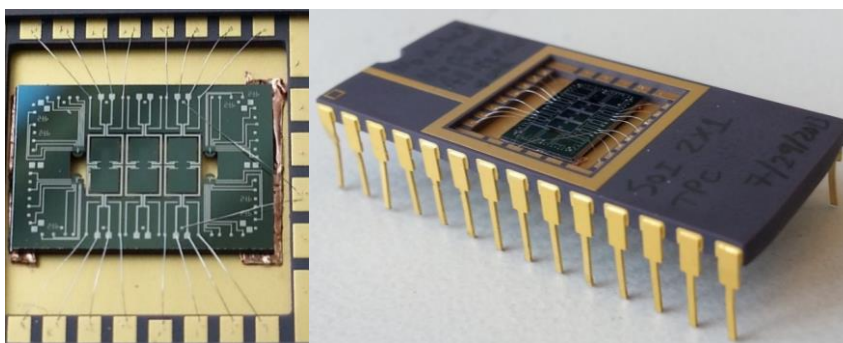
Photographs of a 2 mm x 1 mm μ TPC die mounted in ceramic DIL package.
